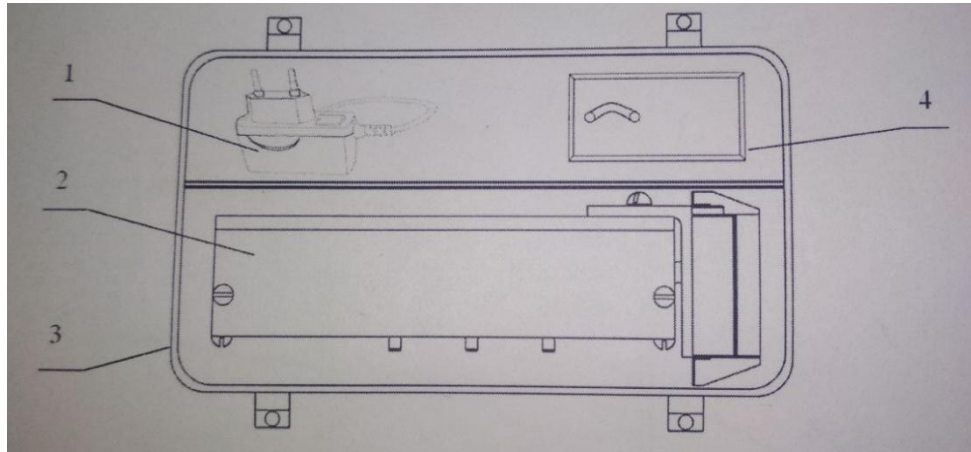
Device: 1- charger; 2- control unit; 3- box; 4- spare parts kit.
